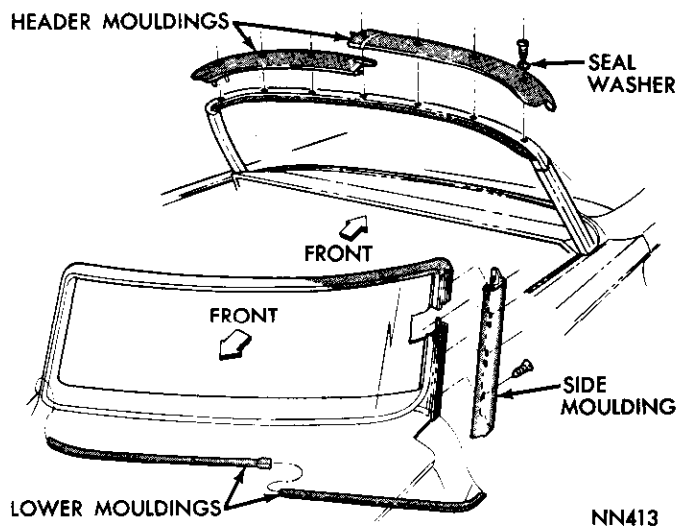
Windshield Mouldings (Coronet)—(Convertible)
